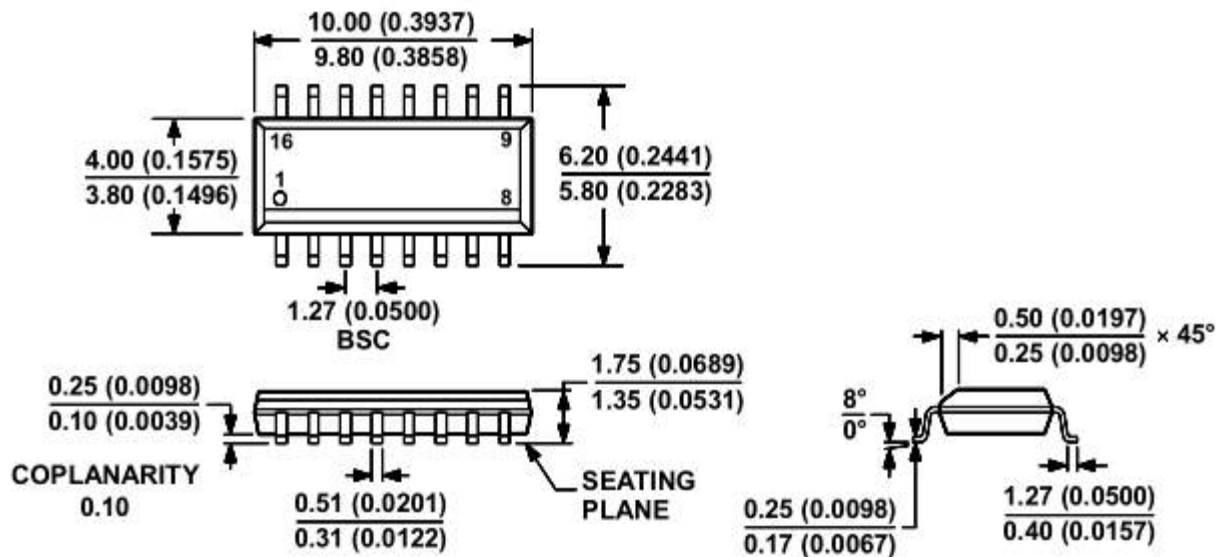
NB SOIC16 Package Shape and Dimension in millimeters (inches)
